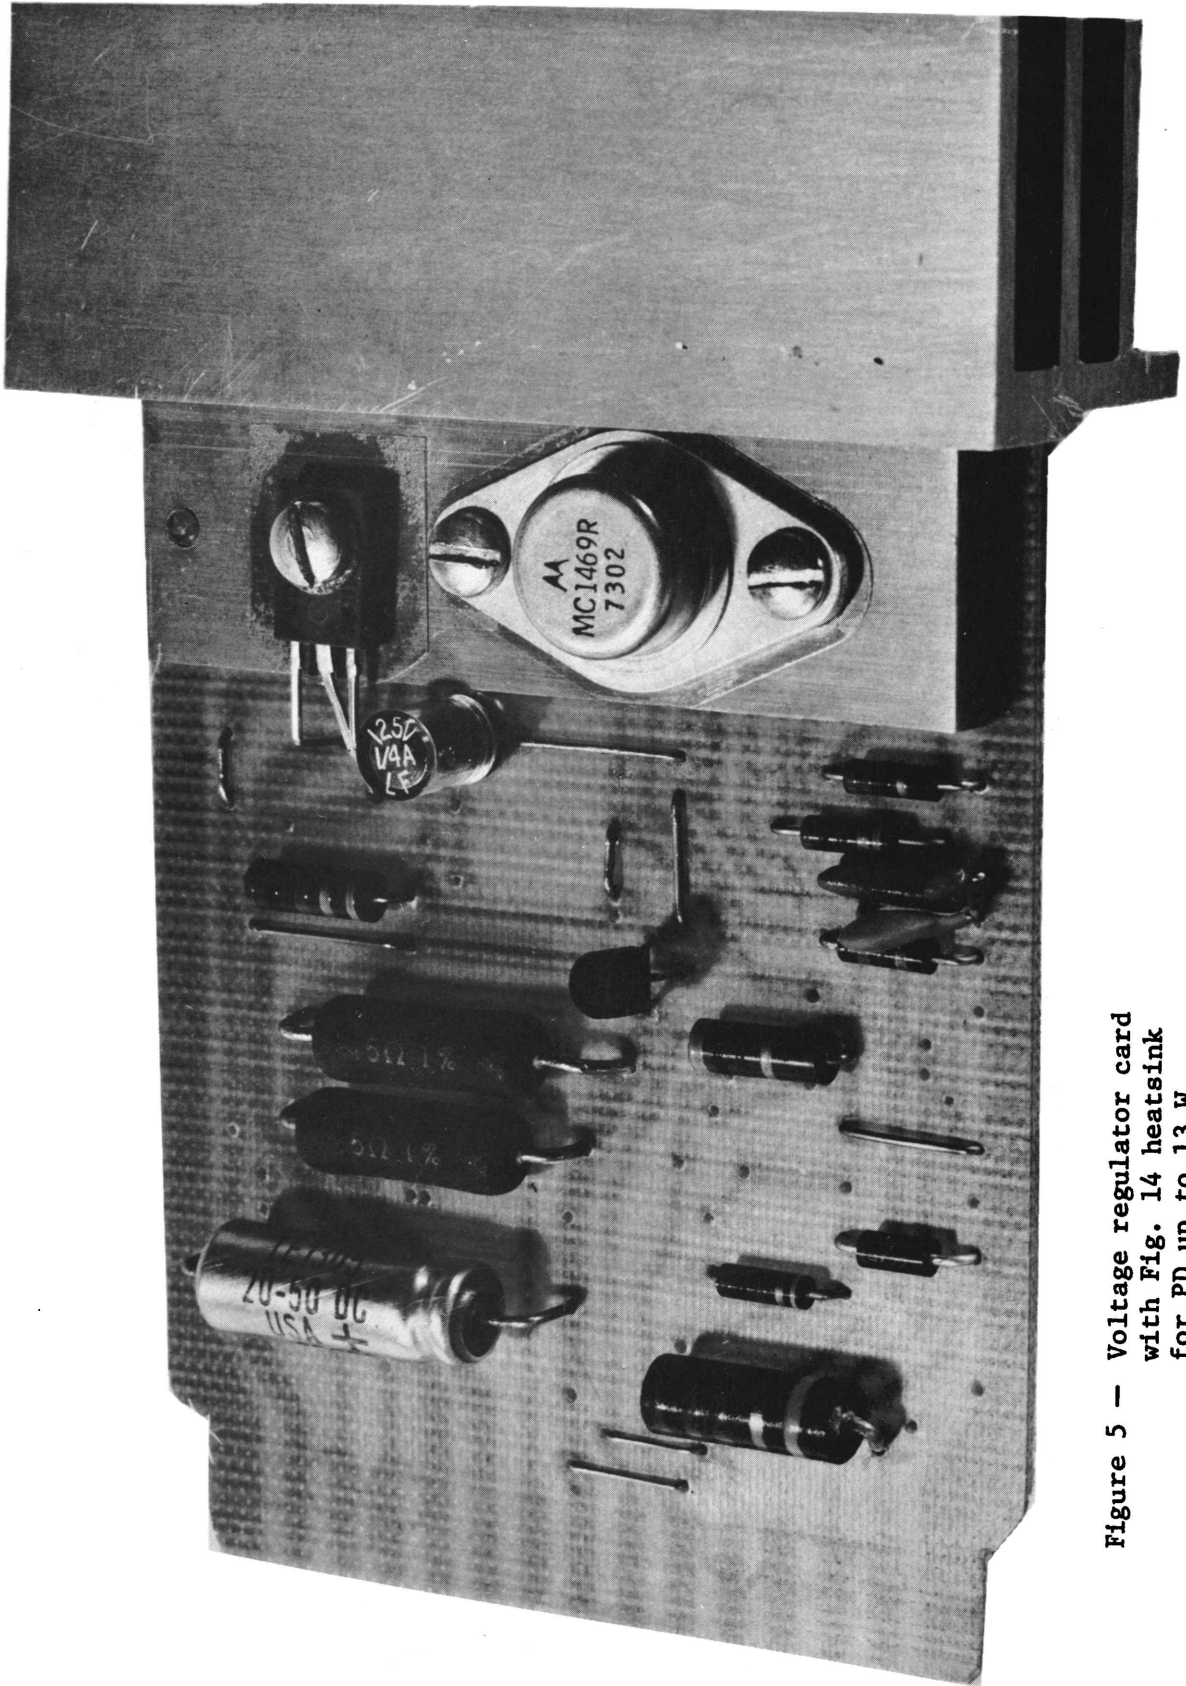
Voltage regulator card with Fig. 14 heatsink for PD up to 13 W.
